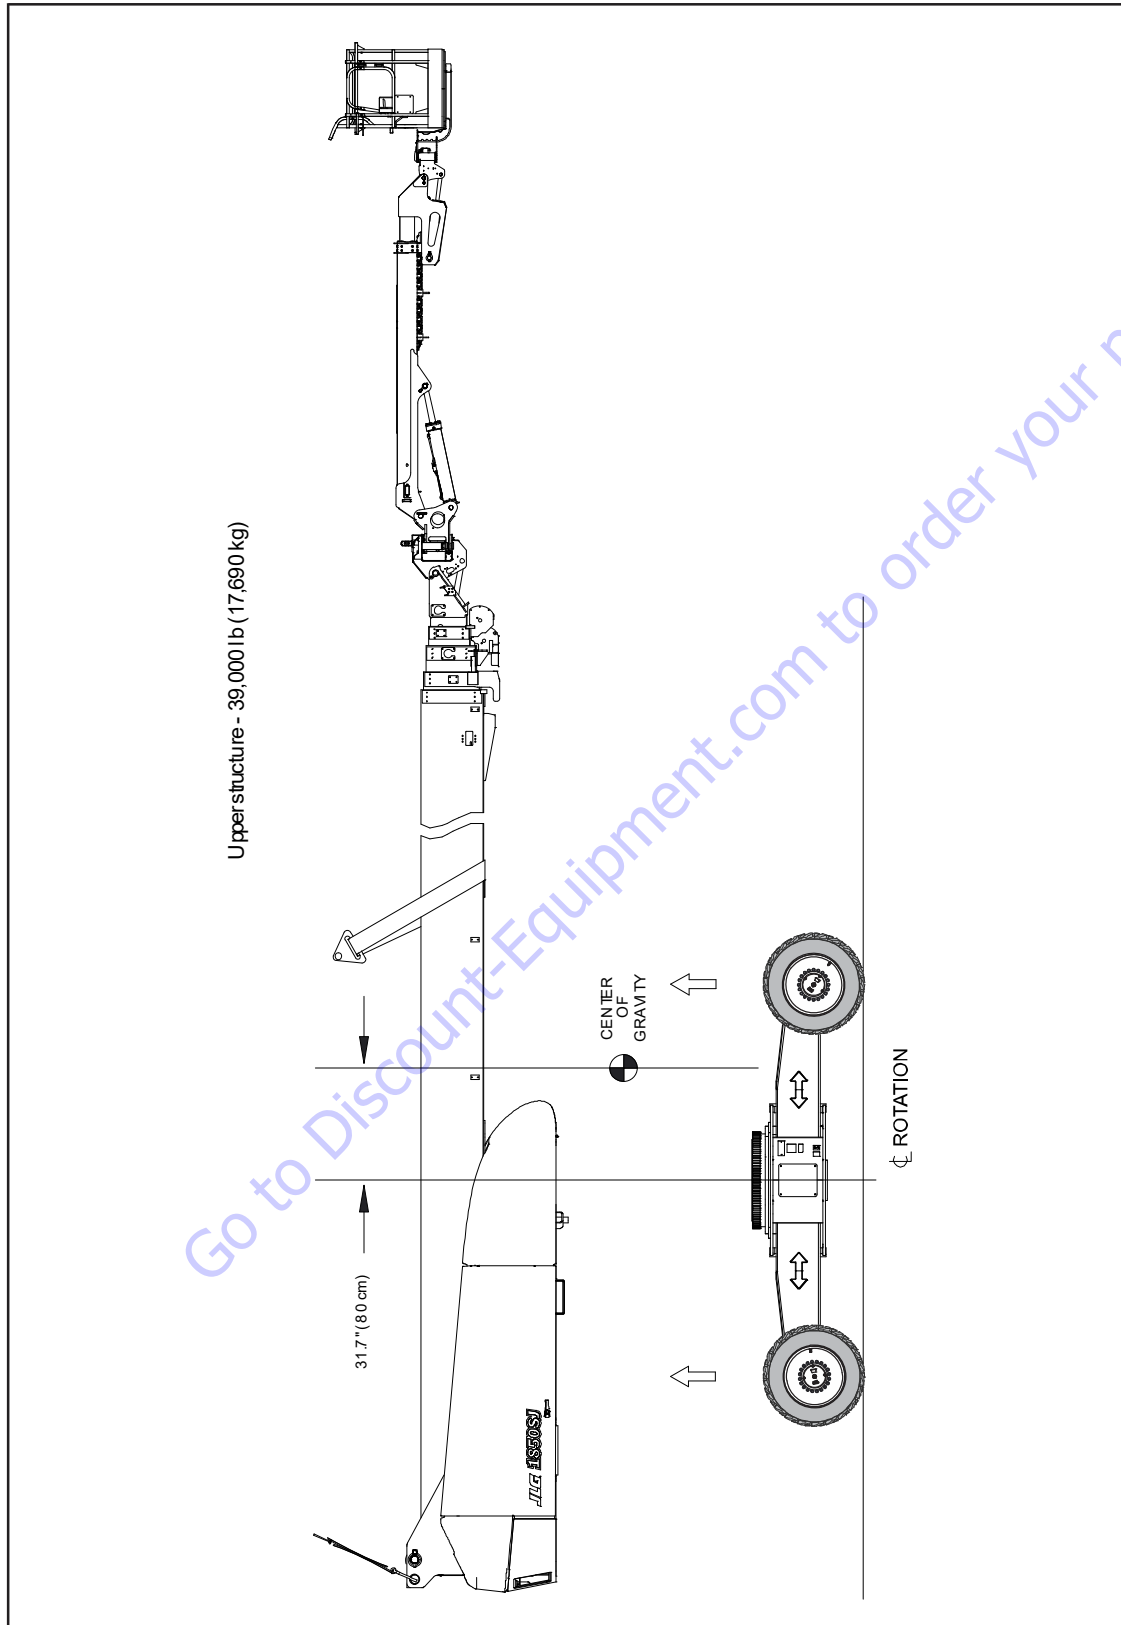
Swing Bearing Removal - Sheet 1 of 4
